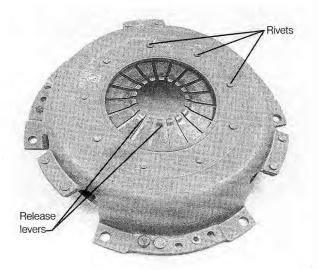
Clutch pressure plate rivets and release lever tips to be checked.
